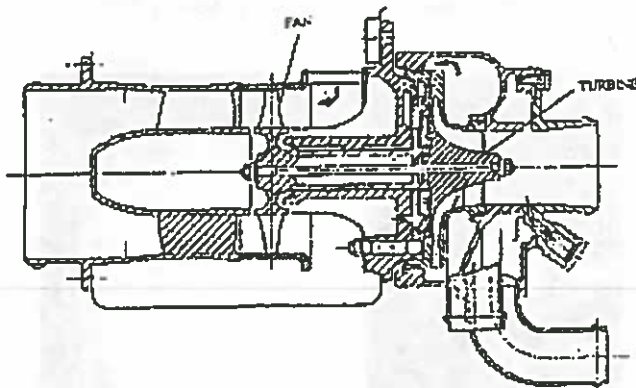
MIA1 Tank Foil Bearing Air Cycle Machine
